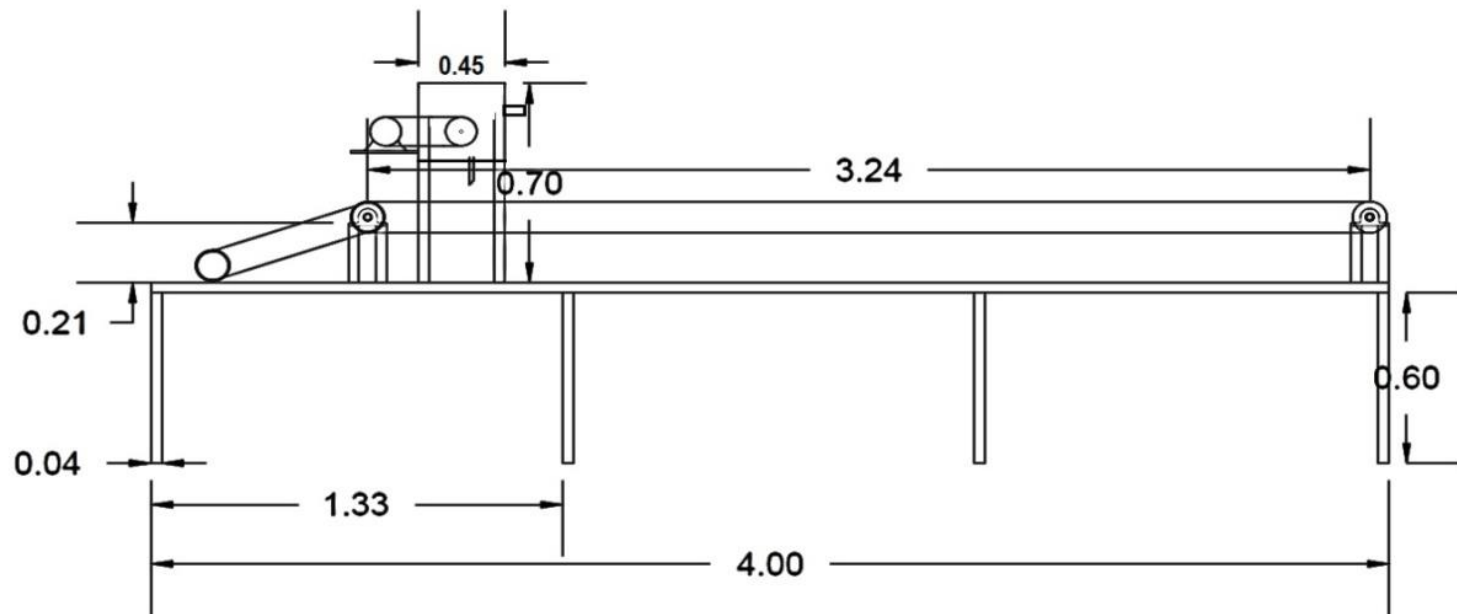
Side view of sticky belt test rig (all dimensions are in meter)
